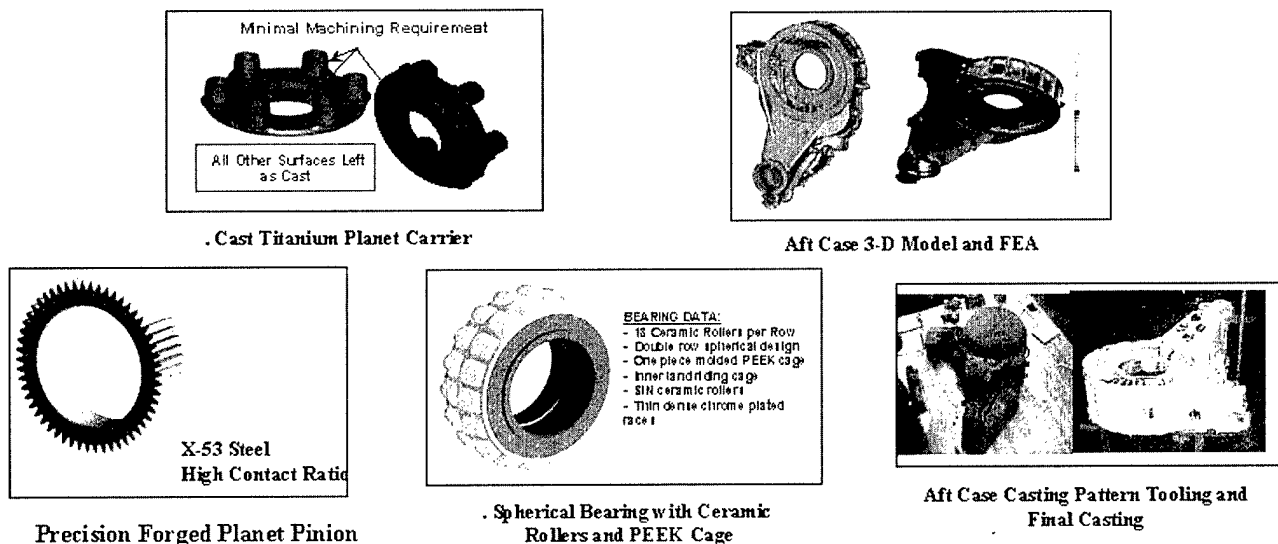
ROTORCRAFT DRIVE TECHNOLOGY
